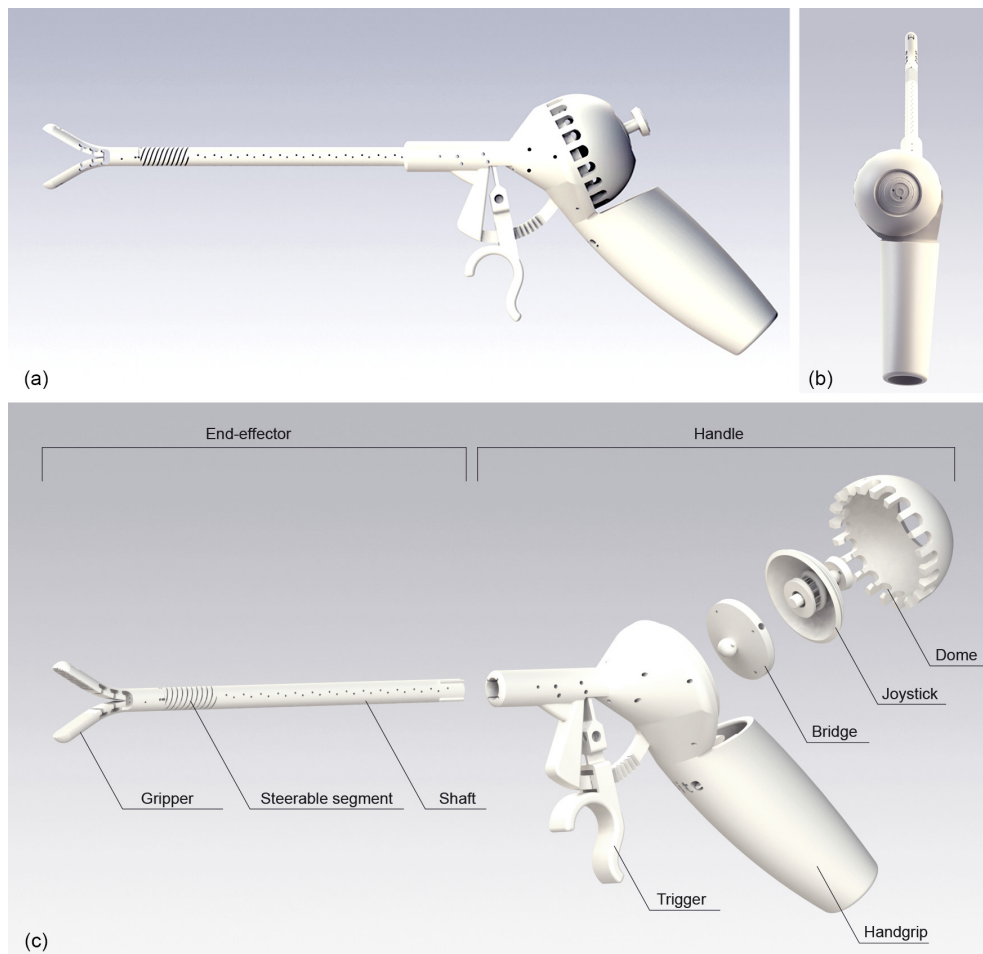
Design of 3D-GriP. (a) Side view. (b) Back view. (c) Exploded view with the names of the parts indicated.
